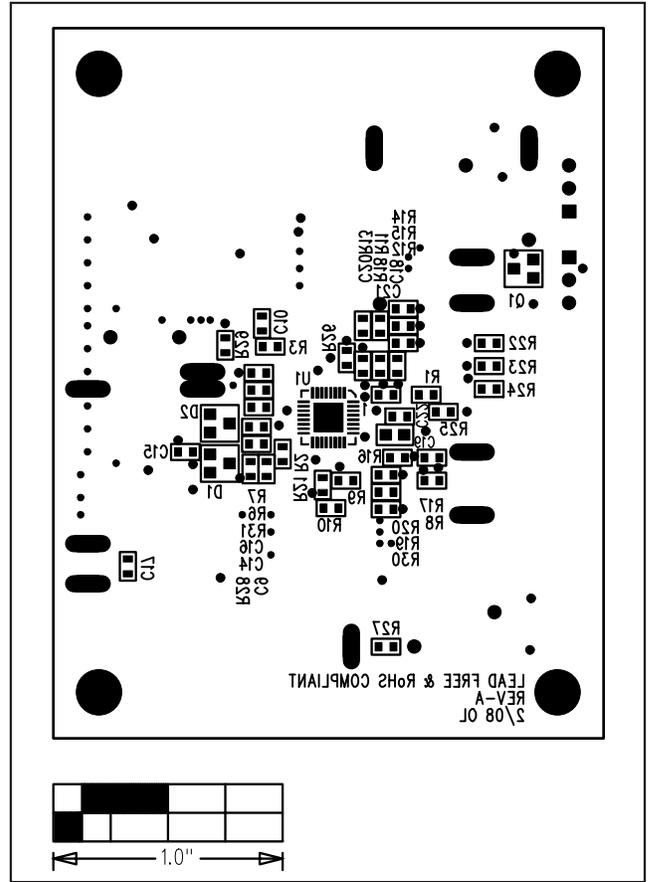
MAX17020 EV Kit Component Placement Guide—Solder Side
